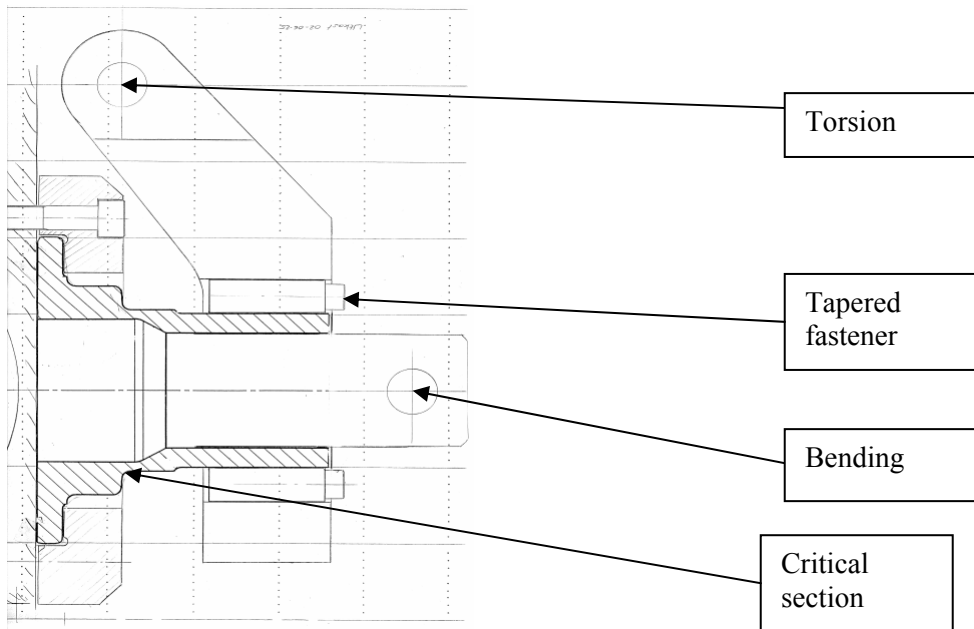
Longitudinal cross section through the test object with gripping arrangement at the loading position in the test fixture.
